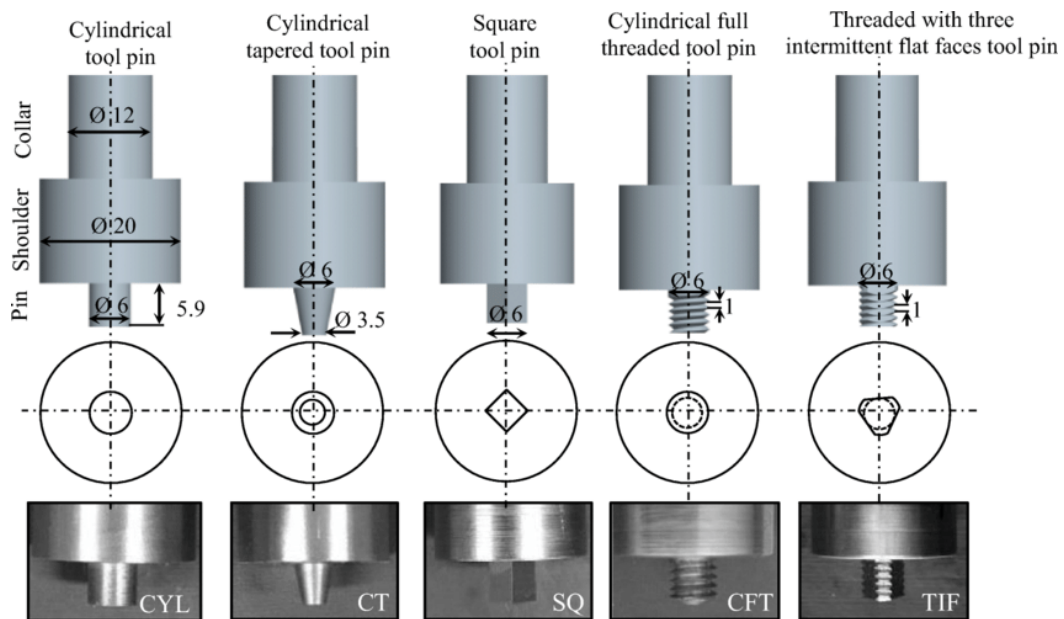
Different tool pin profiles that can be used in FSW (dimension in millimeters) [19].
